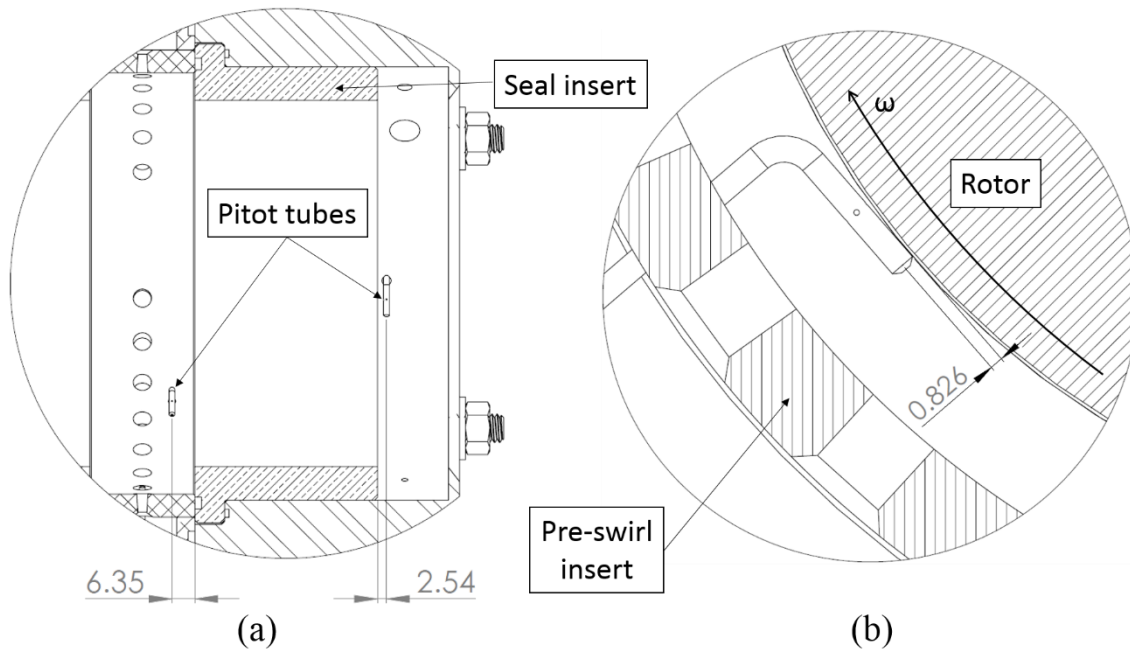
(a) Axial position and (b) radial position of the pitot tubes. All dimensions in mm.
